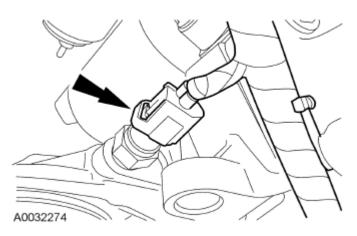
Locating Oil Pressure Sensor Electrical Connector Courtesy of FORD MOTOR CO.
